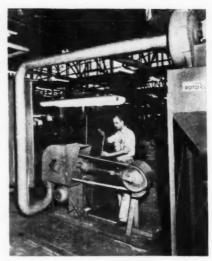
Sliding panel in this roll polisher permits handling different size materials.
